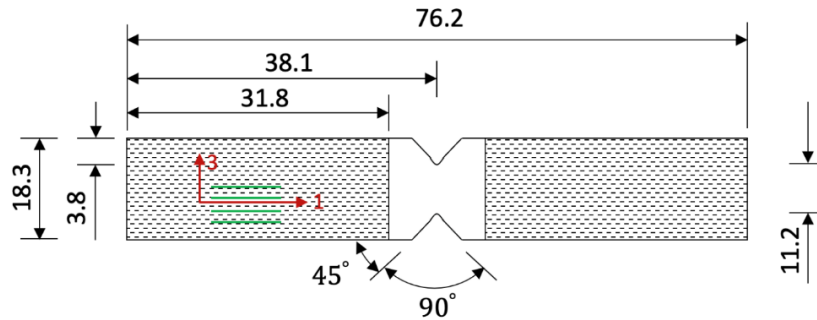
Typical specimen geometry and layout (dimensions shown in mm).
